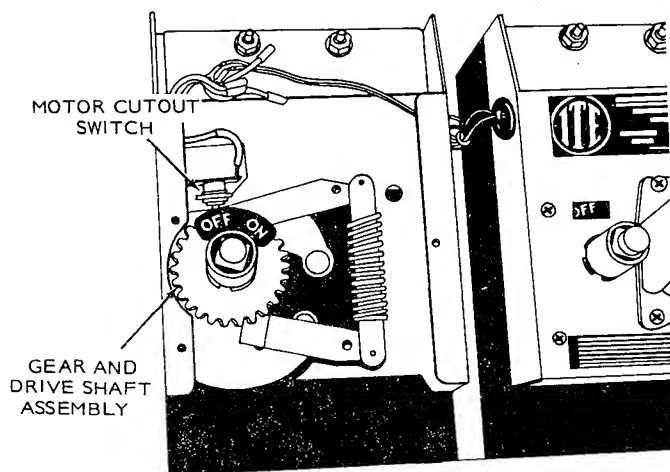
GEAR AND DRIVE ASSEMBLY OF TRANSFER SWITCH
